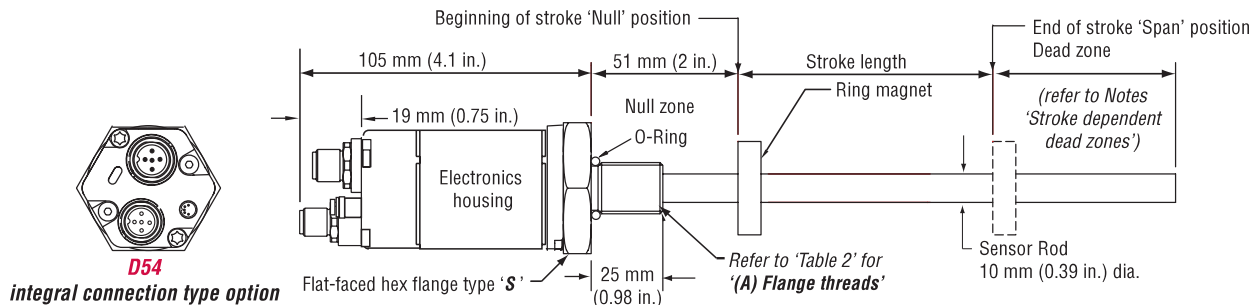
Model RH Rod-style sensor dimension reference (Shown with the D54 integral cable connection type option)
